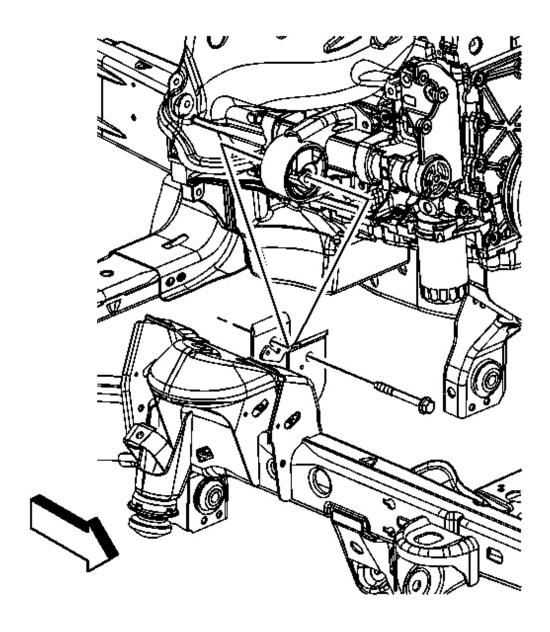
Identifying Right Engine Mount-To-Frame Bracket Bolt Courtesy of GENERAL MOTORS CORP.
